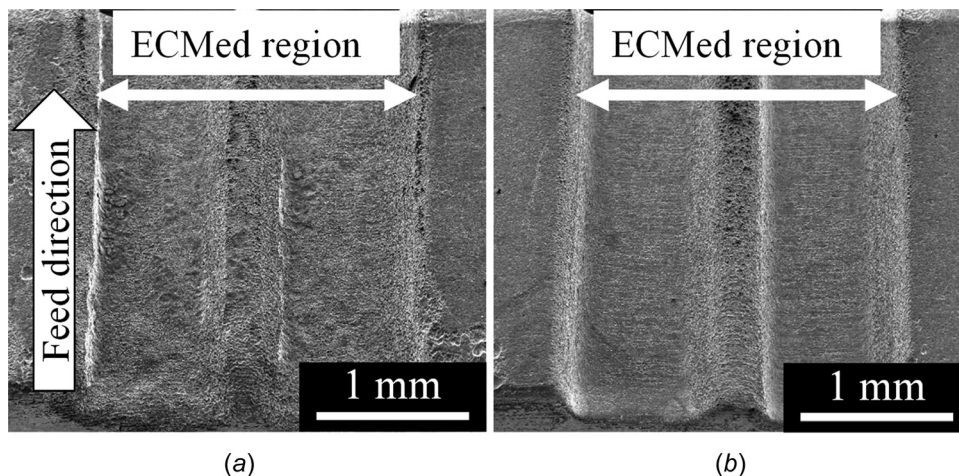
ECMed surfaces of grooves with convex inner structures: (a) without tool rotation and (b) with tool rotation
